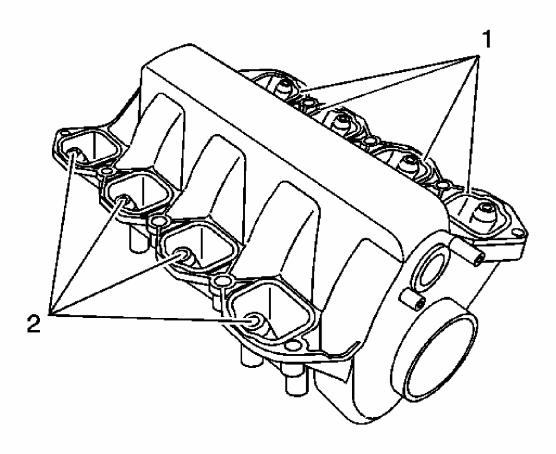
Inspecting Intake Manifold For Damage To Sealing Surfaces & Fuel Injector Bores
